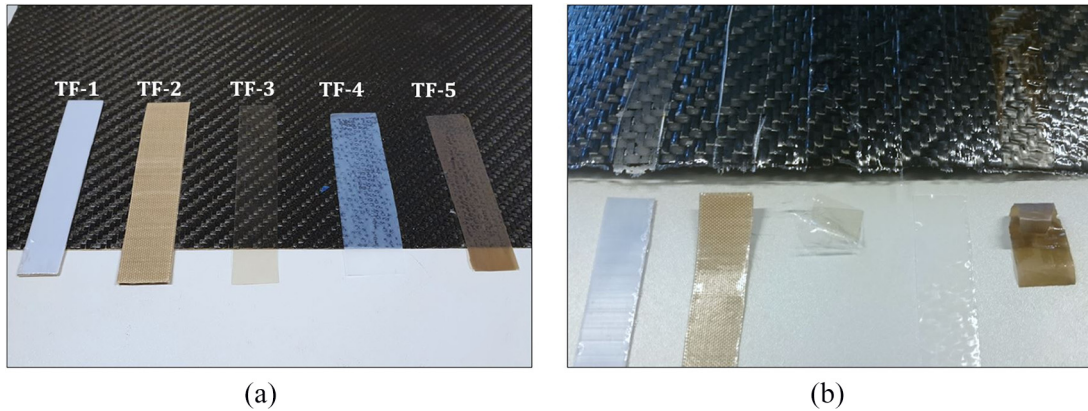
Thin film specimens: (a) before and (b) after peel test.
